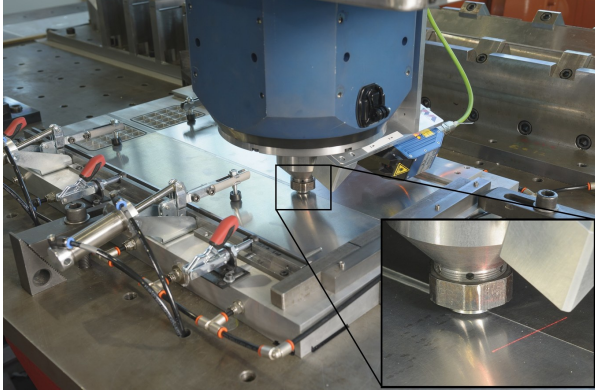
FSW equipment used in the experiments. In particular, the stationary-shoulder FSW tool is magnified in the lower-right figure.
